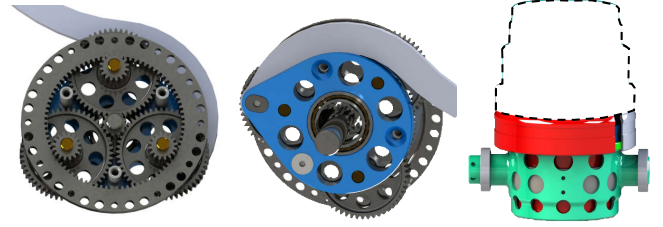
Planetary gearbox design with three compound planet gears (left); curved upper-link design (middle); hip and knee motor module (right)
